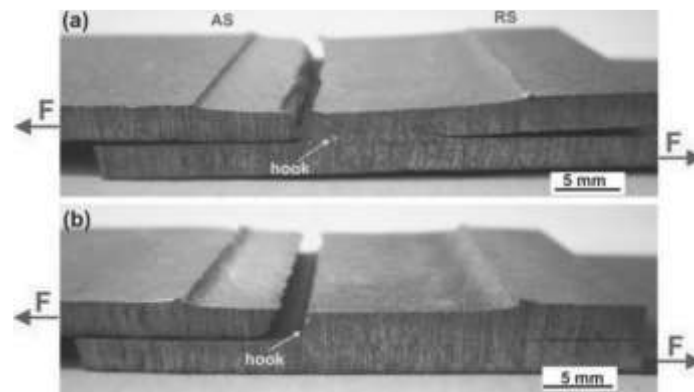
Tensile-shear tested samples of AZ31B welds displaying fracture in hook location (top:  $h = 0.28$  mm, and bottom:  $h = 1.34$  mm)
